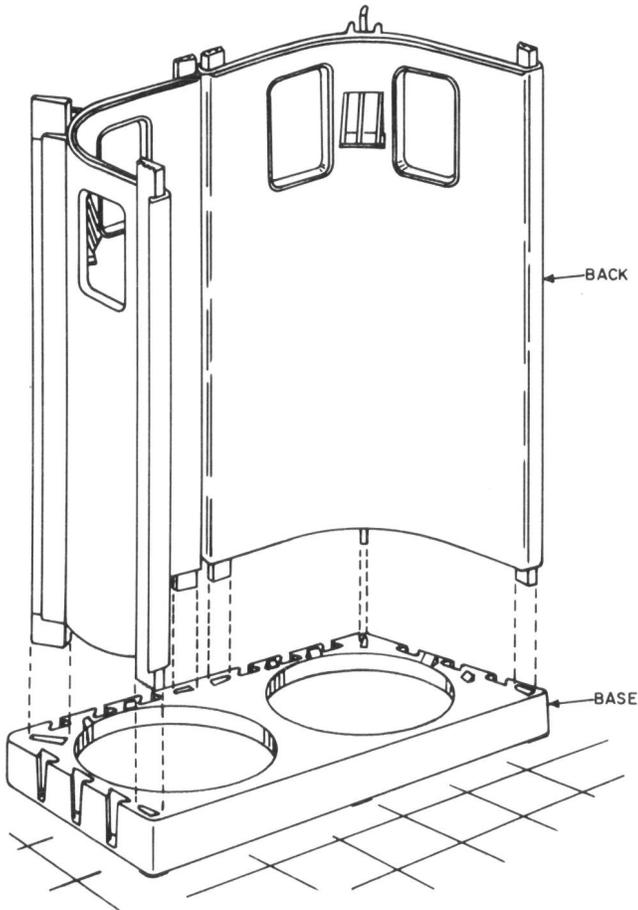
Polyester Battery Stand (Typical) Before Assembly
